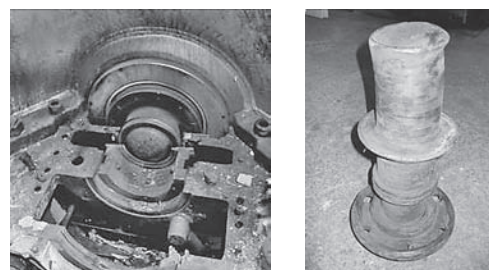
a) View of the fracture surface on the side of turbine, b) view of the broken part of turbine shaft
